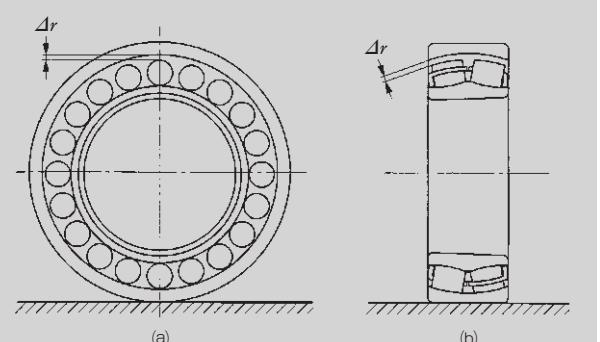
Clearance Measurement Point (Bearing Outside Diameter: Less than 200 mm)
